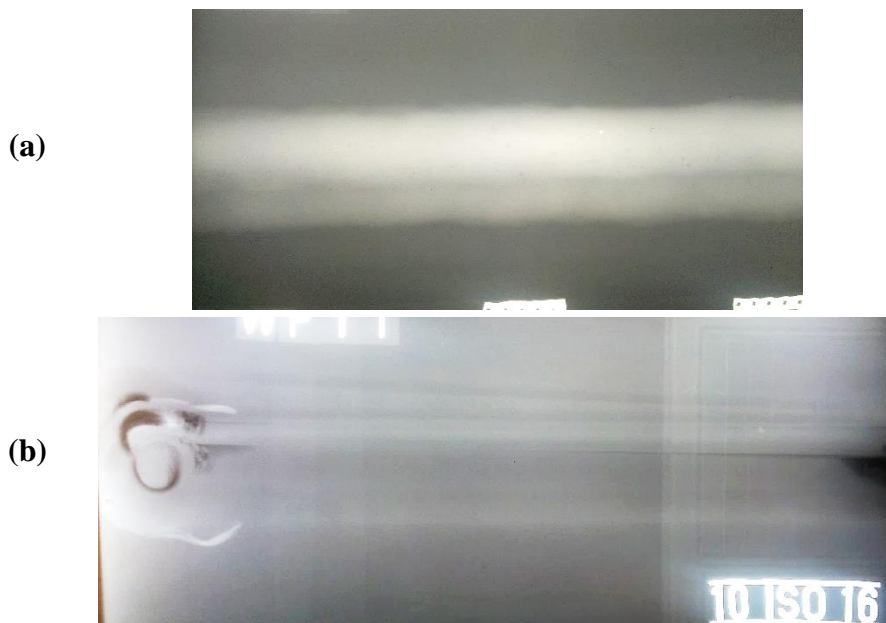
Radiographs of (a) as-welded plate with lack of penetration, (b) after FSP.
